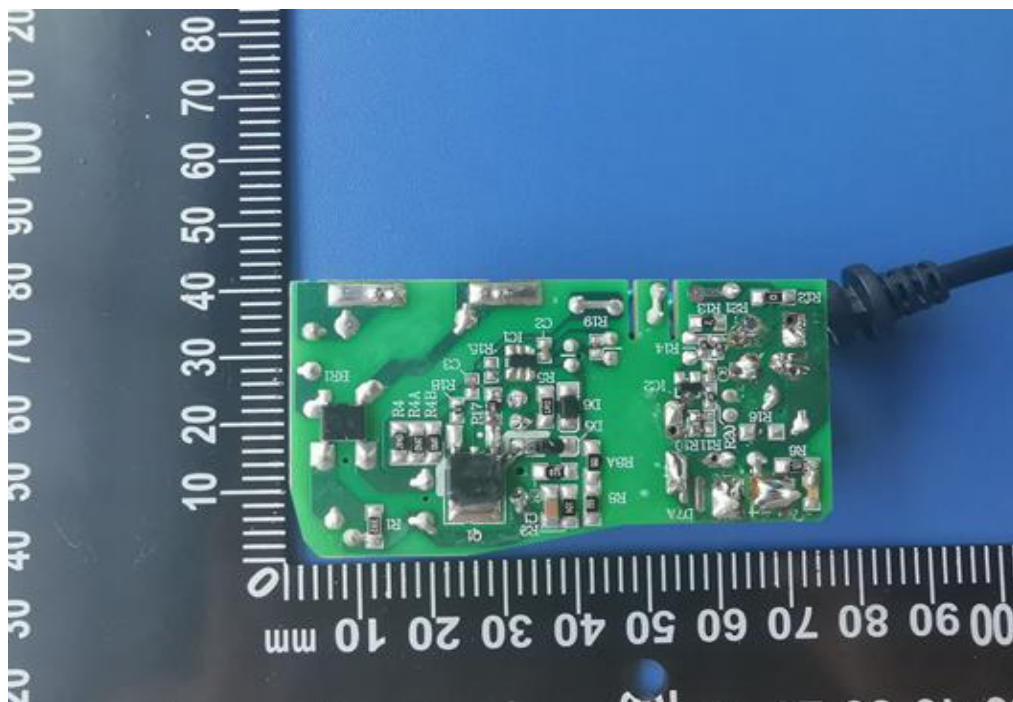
PCB top side view for model IVPxxxx-yyyy (with D7 , LF1)
